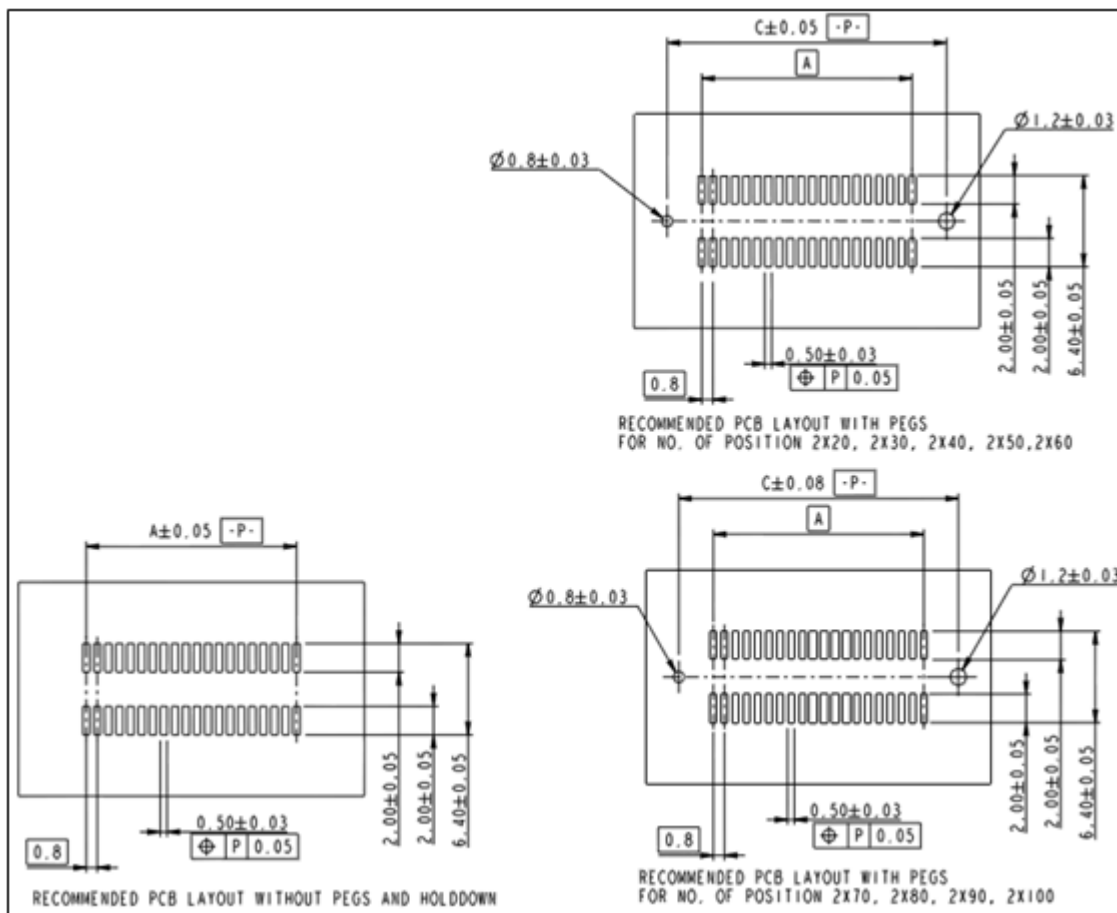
Recommended PCB layout for Receptacles 1 and Plug 1 to 4.
